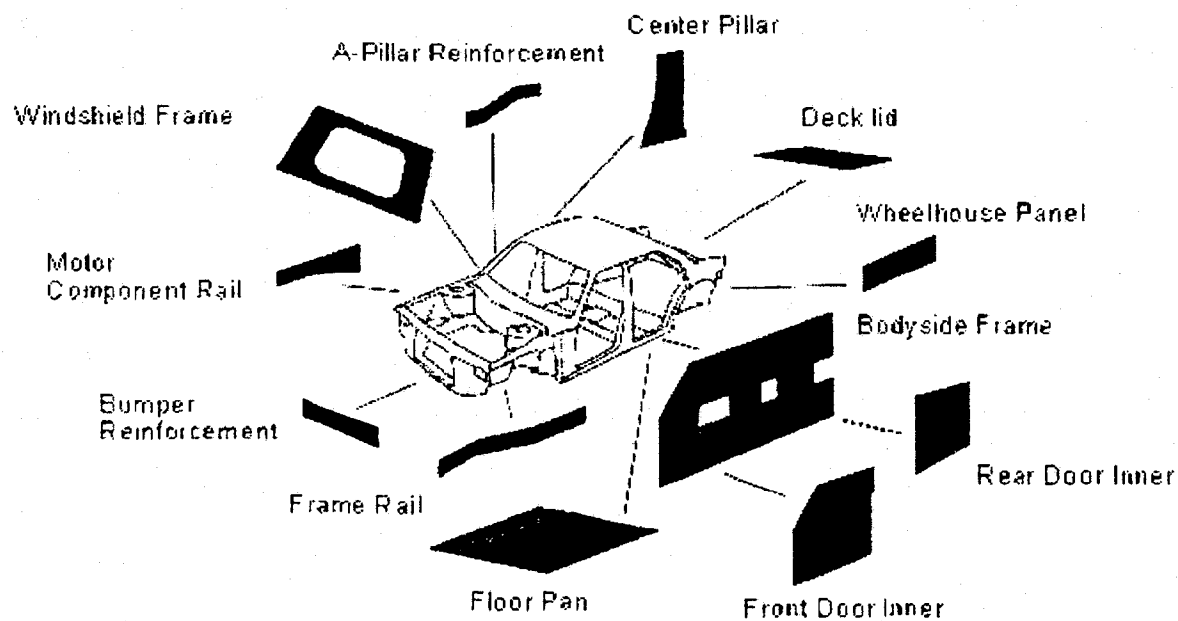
Various tailor welded blank components used in an automotive structure [1].
